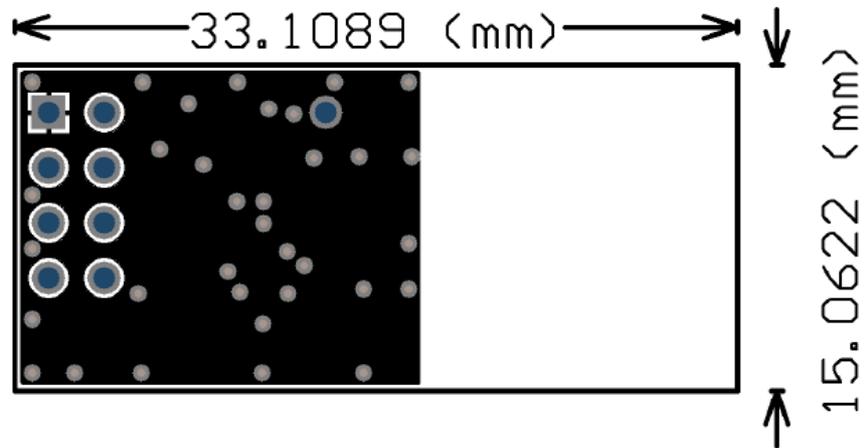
Bottom layer (nRF24L01+ RF layout with single ended connection to PCB antenna and 0402 size passive components)
